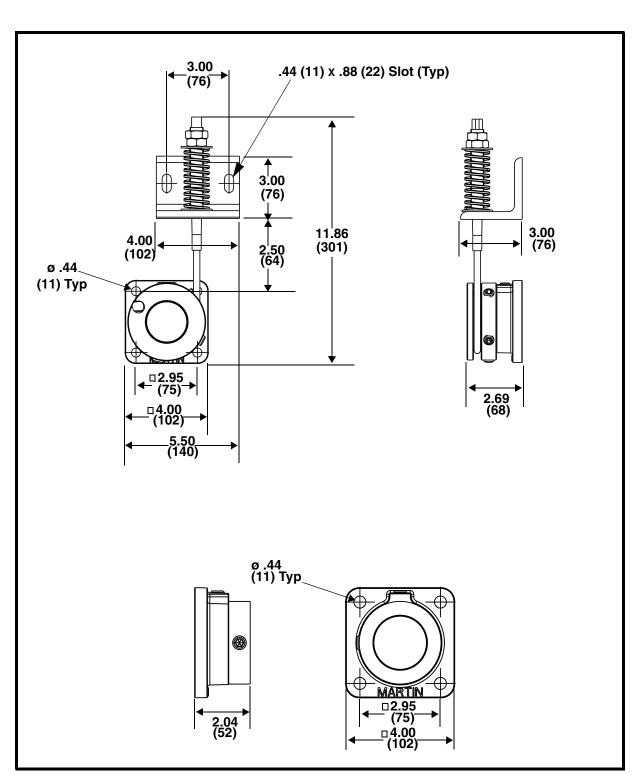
Martin[®] Spring Cable Tensioner Assembly, P/N 37944 (page 1 of 3)
